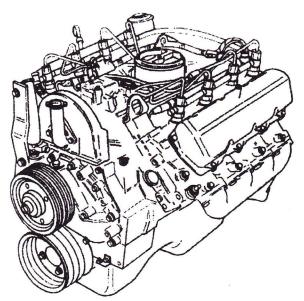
Typical four-stroke diesel engine. *Courtesy of Ford Motor Company
